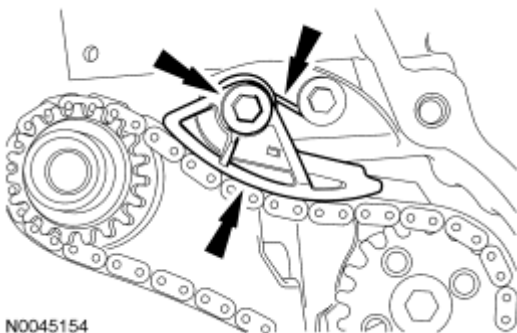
Locating Oil Pump Chain Tensioner And Bolt
